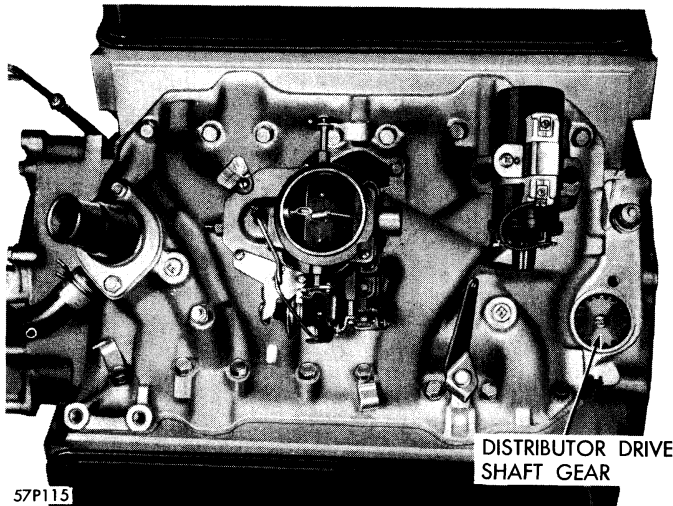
Position of Distributor Drive Shaft—277, 301 and 318 Cubic Inch V-8 Engine
